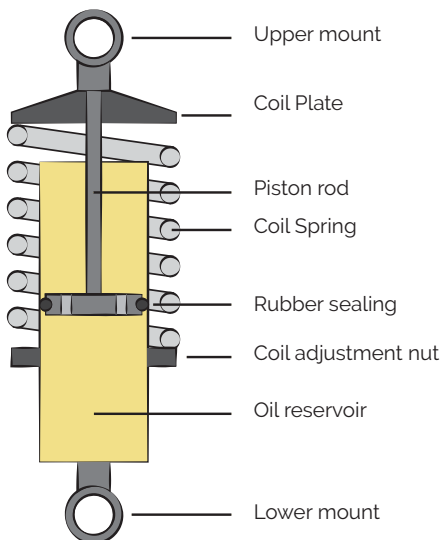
(left) Oil-filled coil-over shock absorber consisting out of a spring, an oil-filled cylinder, a piston, a piston rod, an upper mount and a lower mount.
